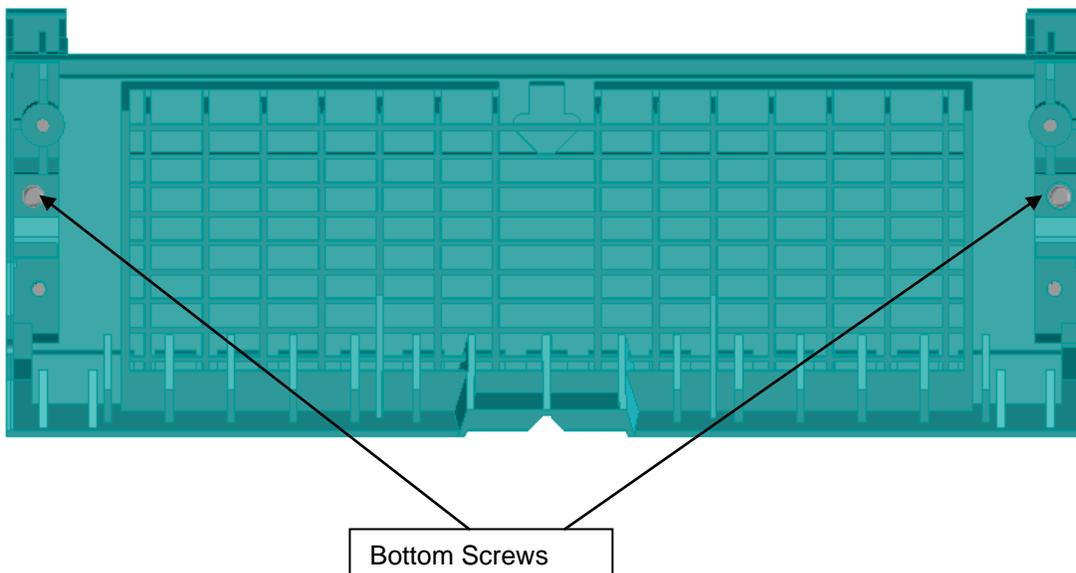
Bottom view of the screw locations on the Input Tray with top removed
